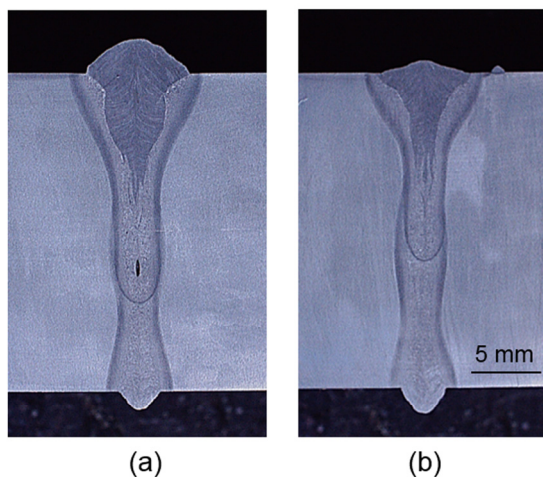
Cross sections of weld beads produced by one-sided hybrid two-passes welding.
